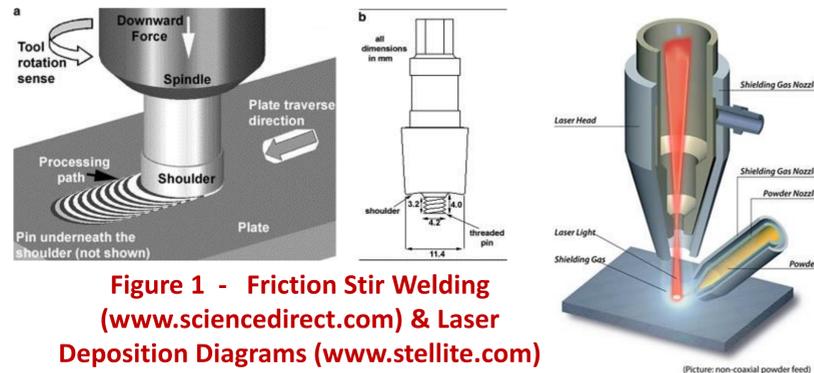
Friction Stir Welding (www.sciencedirect.com) & Laser Deposition Diagrams (www.stellite.com)
